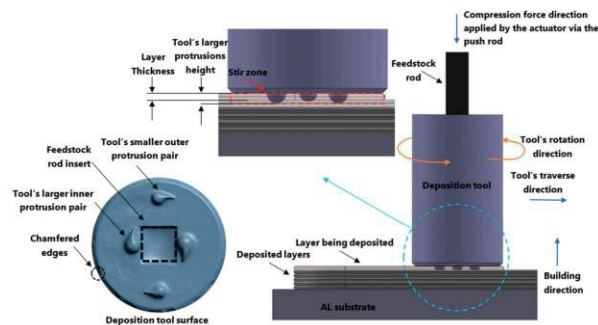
Mechanism of AFSD and the deposition tool design [1]
